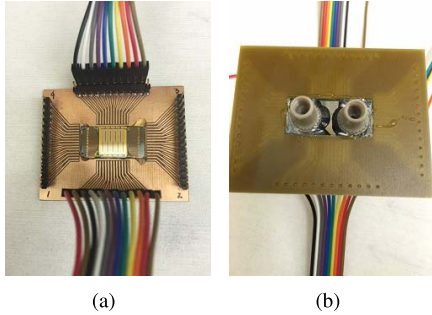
(a) Top and (b) bottom view of the stack assembled to a PCB board using wire bonding.
